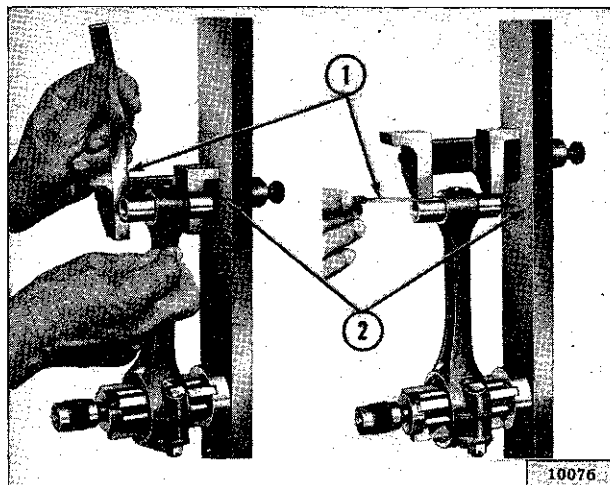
CHECKING CONNECTING ROD ALIGNMENT
